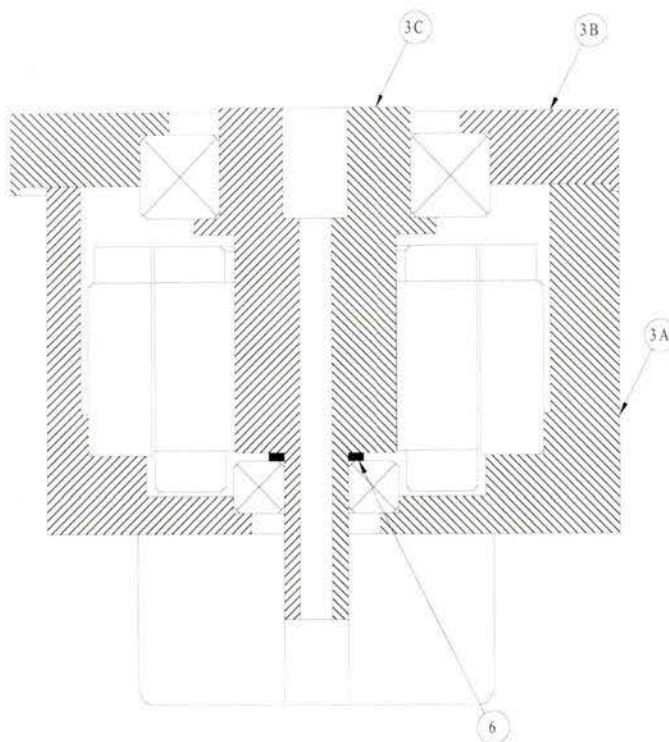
SARA Shoulder Joint: Rotor Shaft
